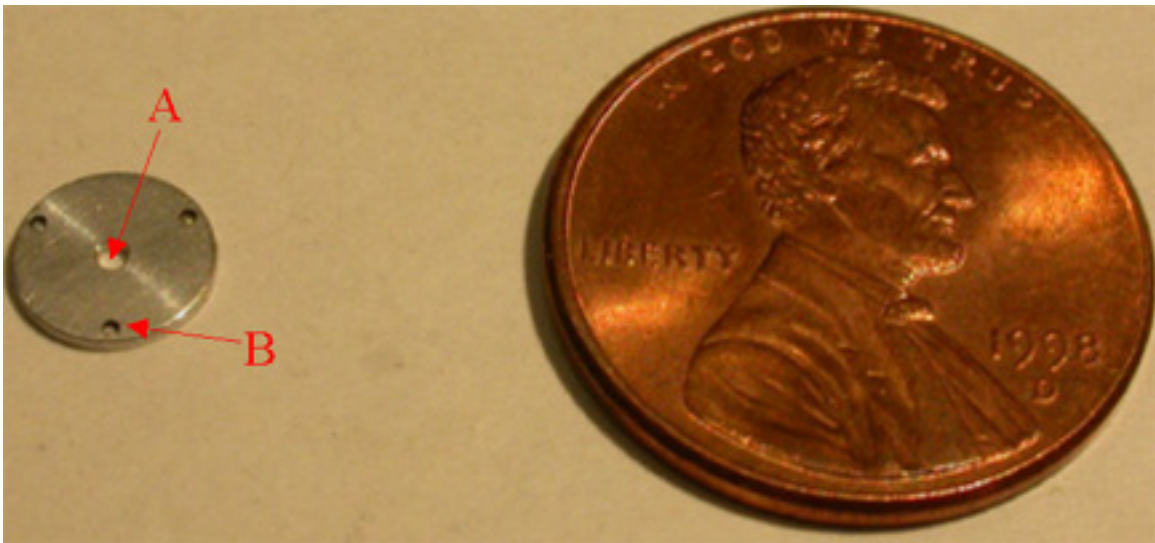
The tube plate of the tip exchange mechanism contains a central hole for mounting of a samarium cobalt magnet to attract the iron tip holder, and three depressions for installing stainless steel ball contacts for stable coupling.
